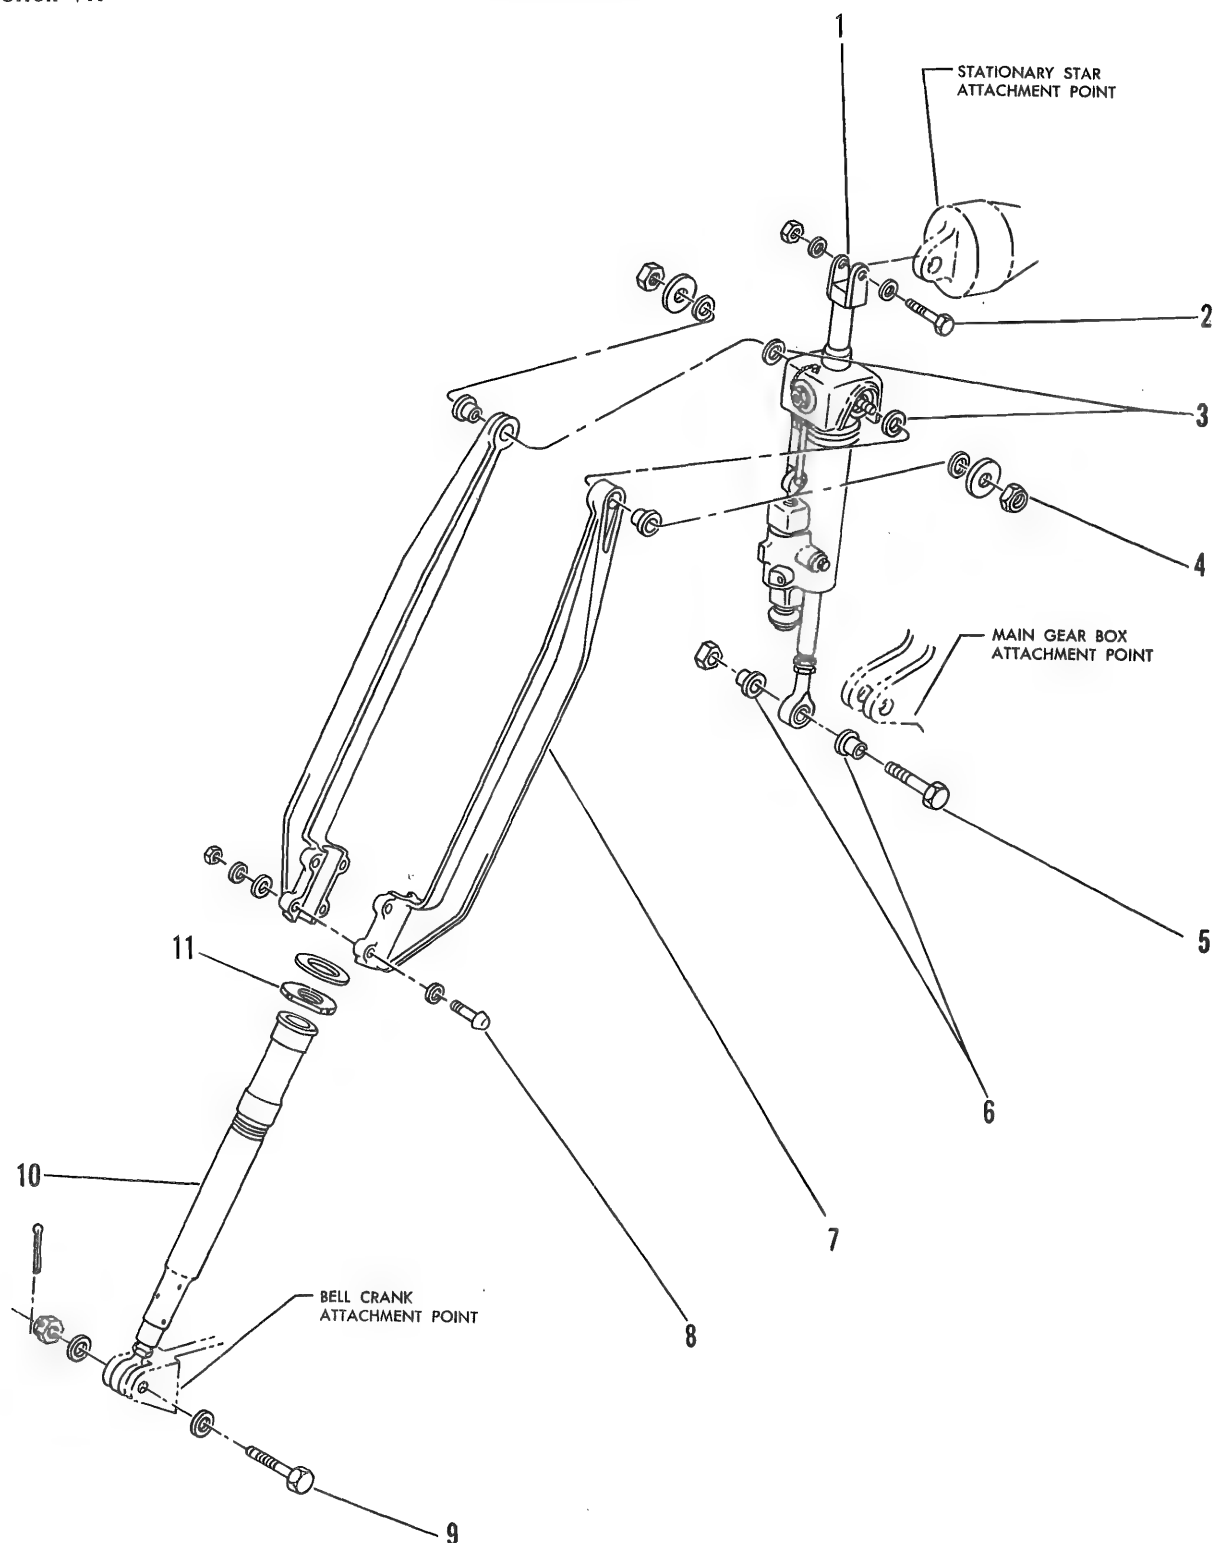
Main Rotor Servo and Forged Control Arm Removal and Disassembly (Sheet 1 of 2)
